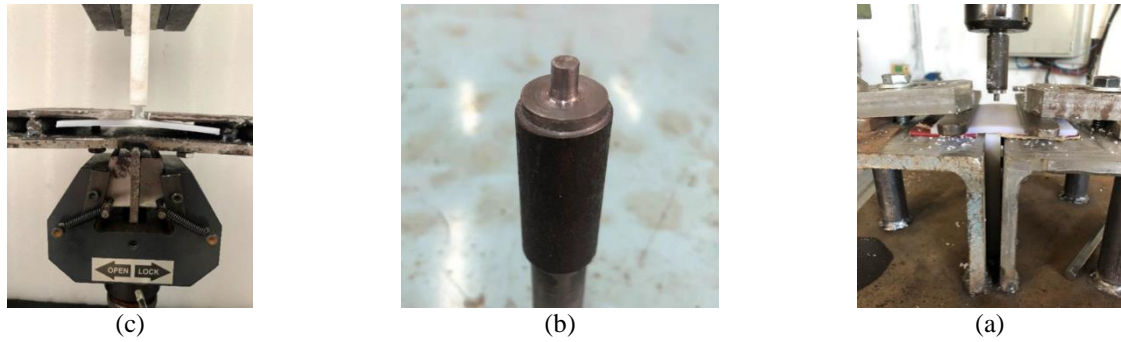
(a) Experimental setup including FSW attachment on a milling machine, clamping system, (b) FSW tool, (c) specimens of t-joint after the tensile test
